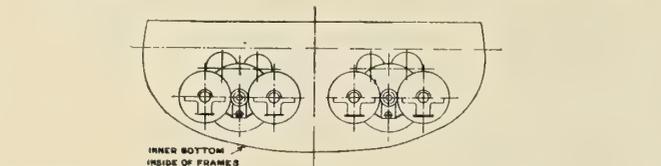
TYPICAL DESTROYER INSTALLATION
